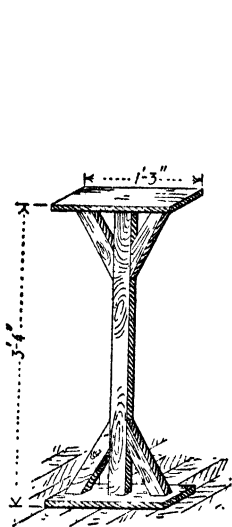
Pedestal for supporting cabinet boxes while marking holes for drilling.
